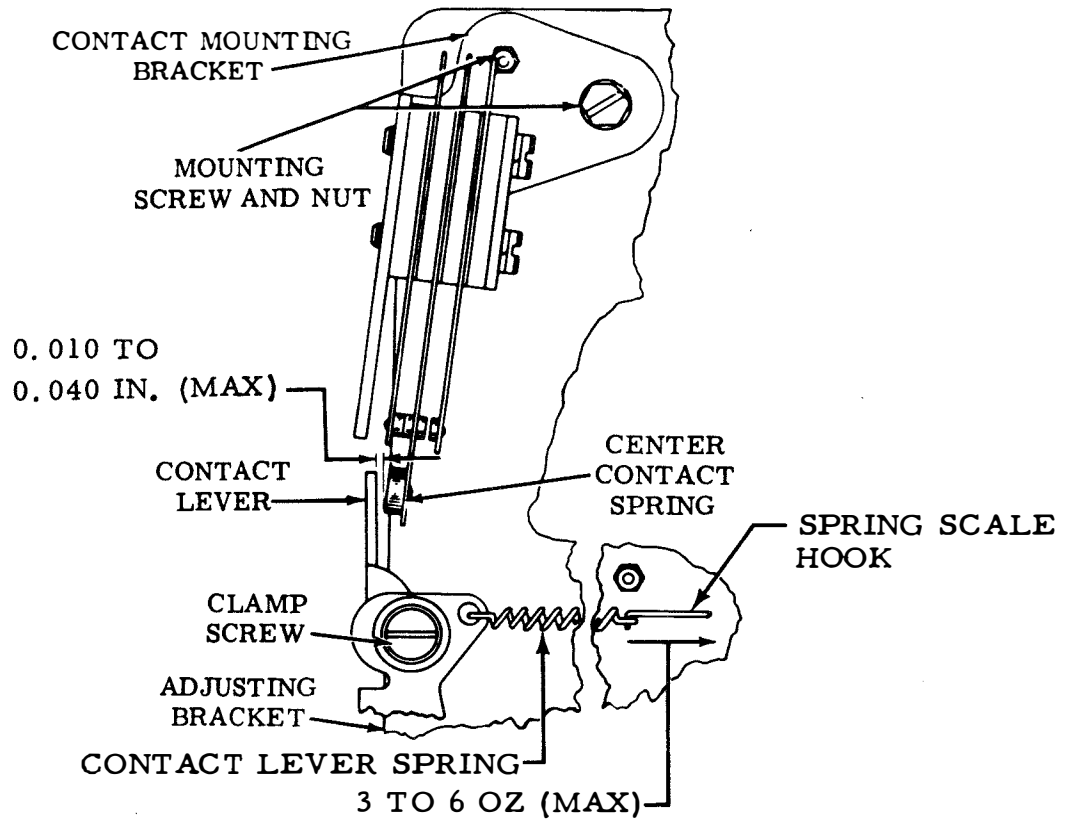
Contact Mounting Bracket, Contact Lever Spring and Contact Pulse Closure
